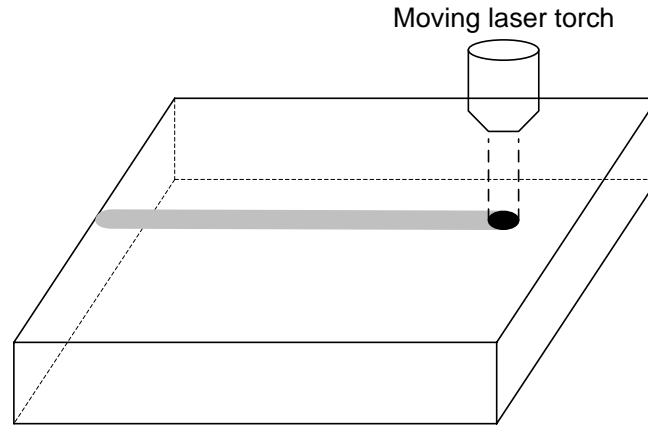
Laser beam impinging on a workpiece of a finite size
